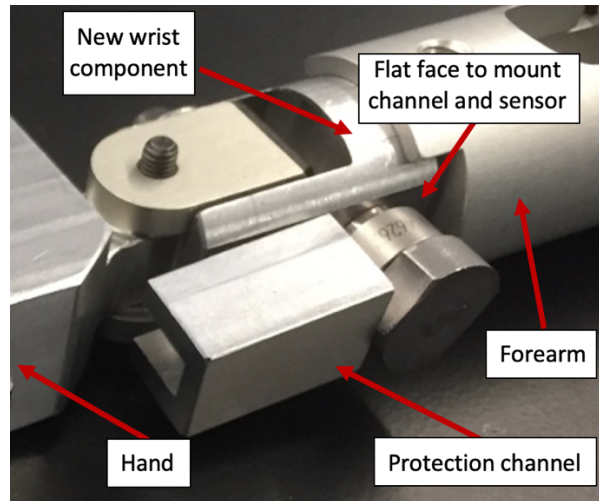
Re-designed wrist component to mount the PCB force sensor
